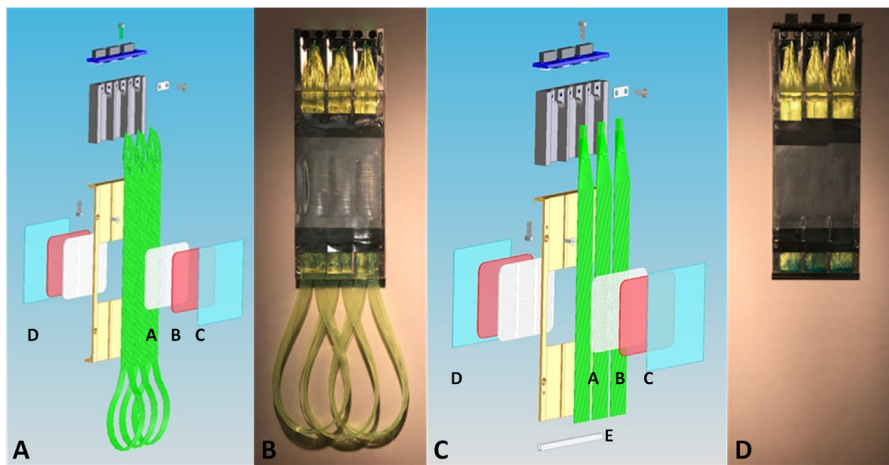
Exploded assembly diagrams and photographs of the triple frame neutron detector in two different configurations. A: Exploded assembly of triple frame with a loop. Layer “a” consists of a 1:2:0.6 Ni-doped scintillator “primer”. Layer “b” is a slab of 1:2:0.14 scintillator. Layer “c” is the Alanod reflector on the leading face. Layer “d” is the Vikuiti reflector on the trailing face. The SiPMs are mounted on a carrier board mating to the WLS fibers (e). B: Photograph of triple frame with the fiber loop. C: Exploded view of the triple frame with a terminal reflector (f) on the frame end. D: Photograph of triple frame with terminal reflector.
